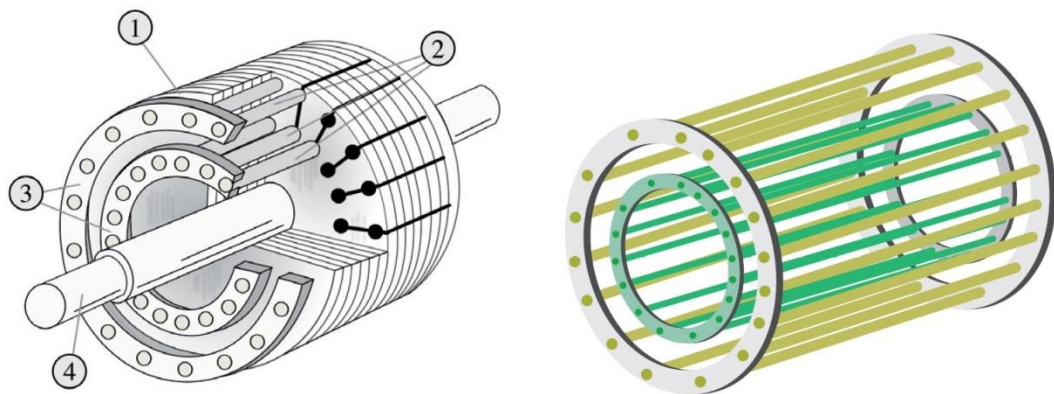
Detailed double squirrel cage rotor construction and winding.
